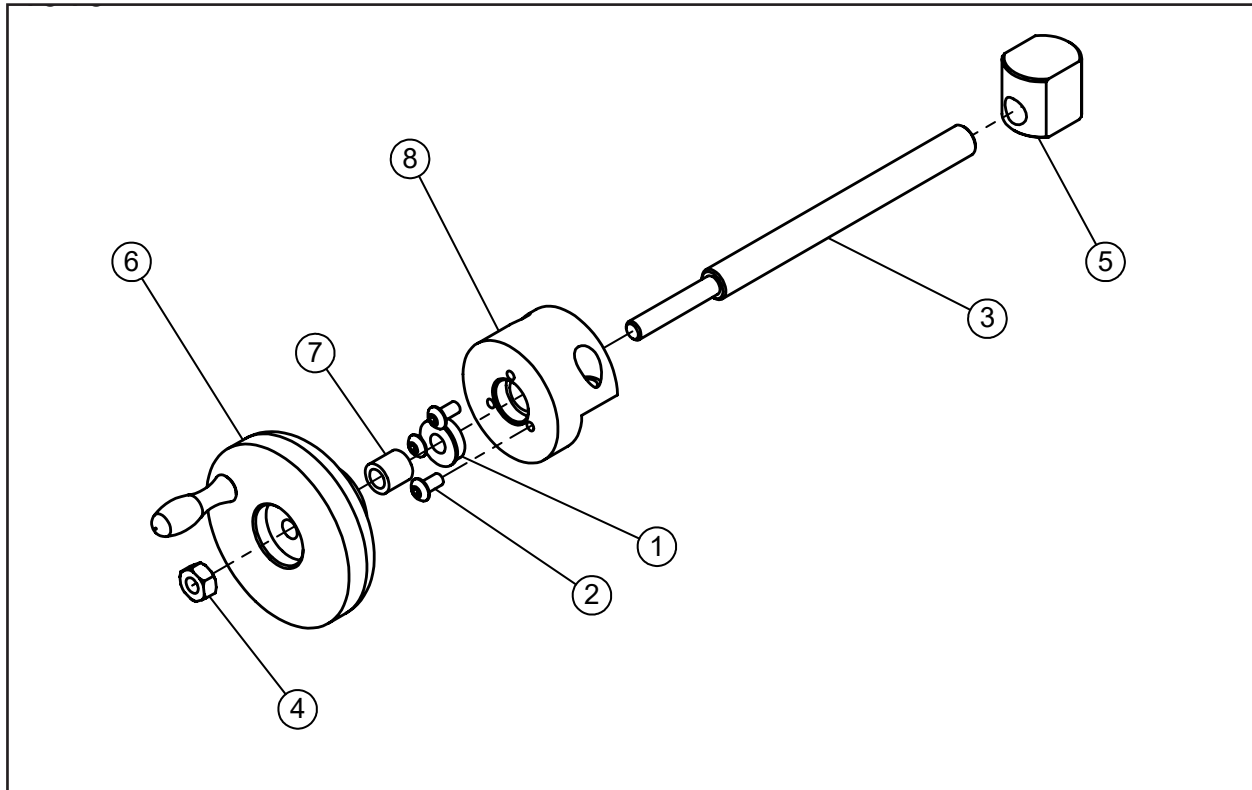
PLATE ASSEMBLY, SPACER, DRIVE GROUP, 536 (24-5050)
